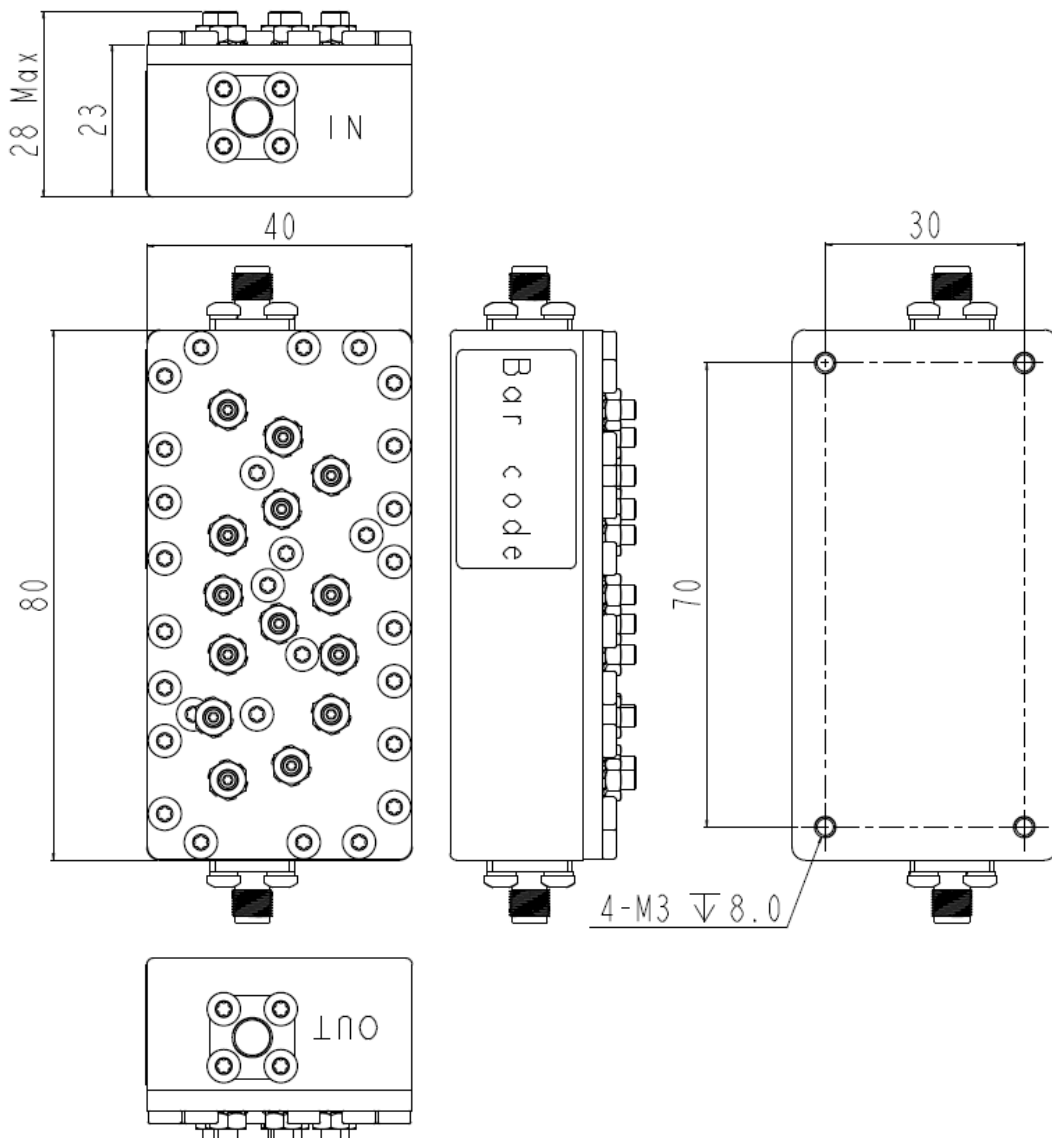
JX-CF1-3300M3800M-S60 front panel layout
